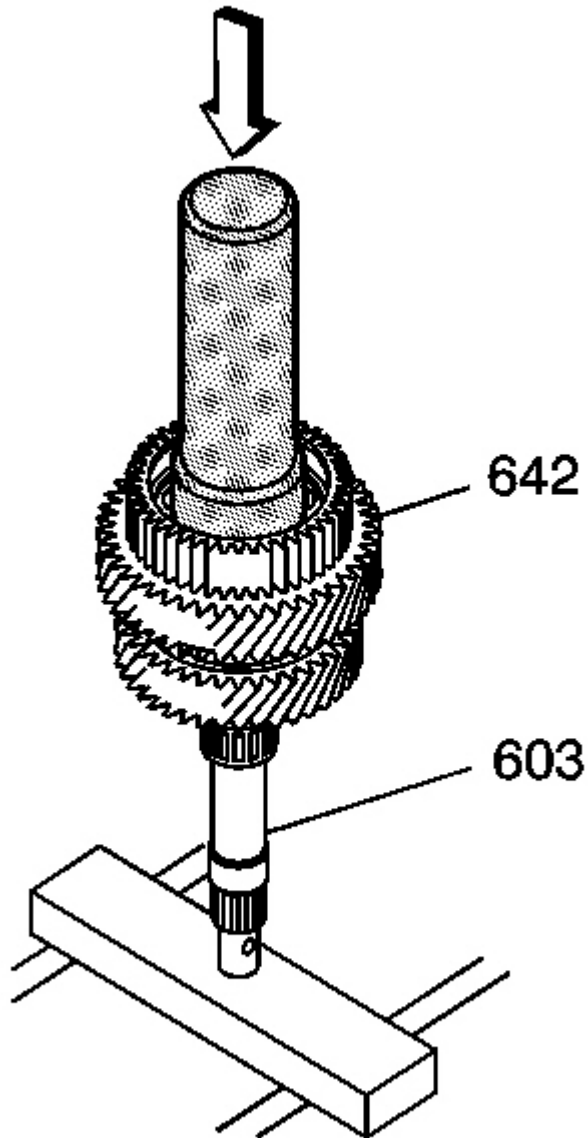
Installing The 4th Drive Gear & Clutch Hub Assembly Using DT 46509
